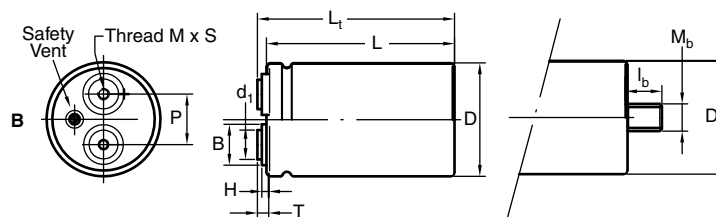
B: High current M6 disc: Screw Terminal (ST) and Screw Terminal Bolt nut (STB)
